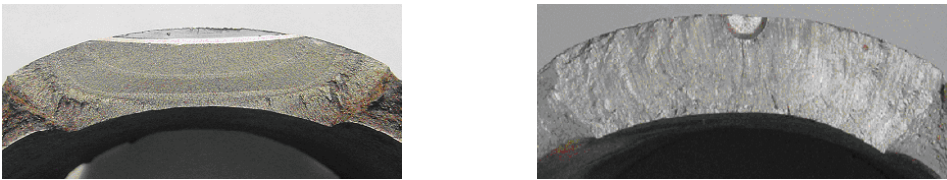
Fracture surface showing crack shape during fatigue crack growth
